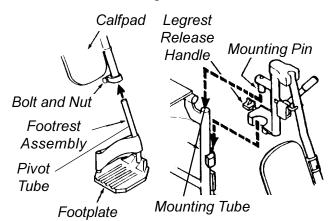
INSTALLING ELEVATING LEGRESTS
